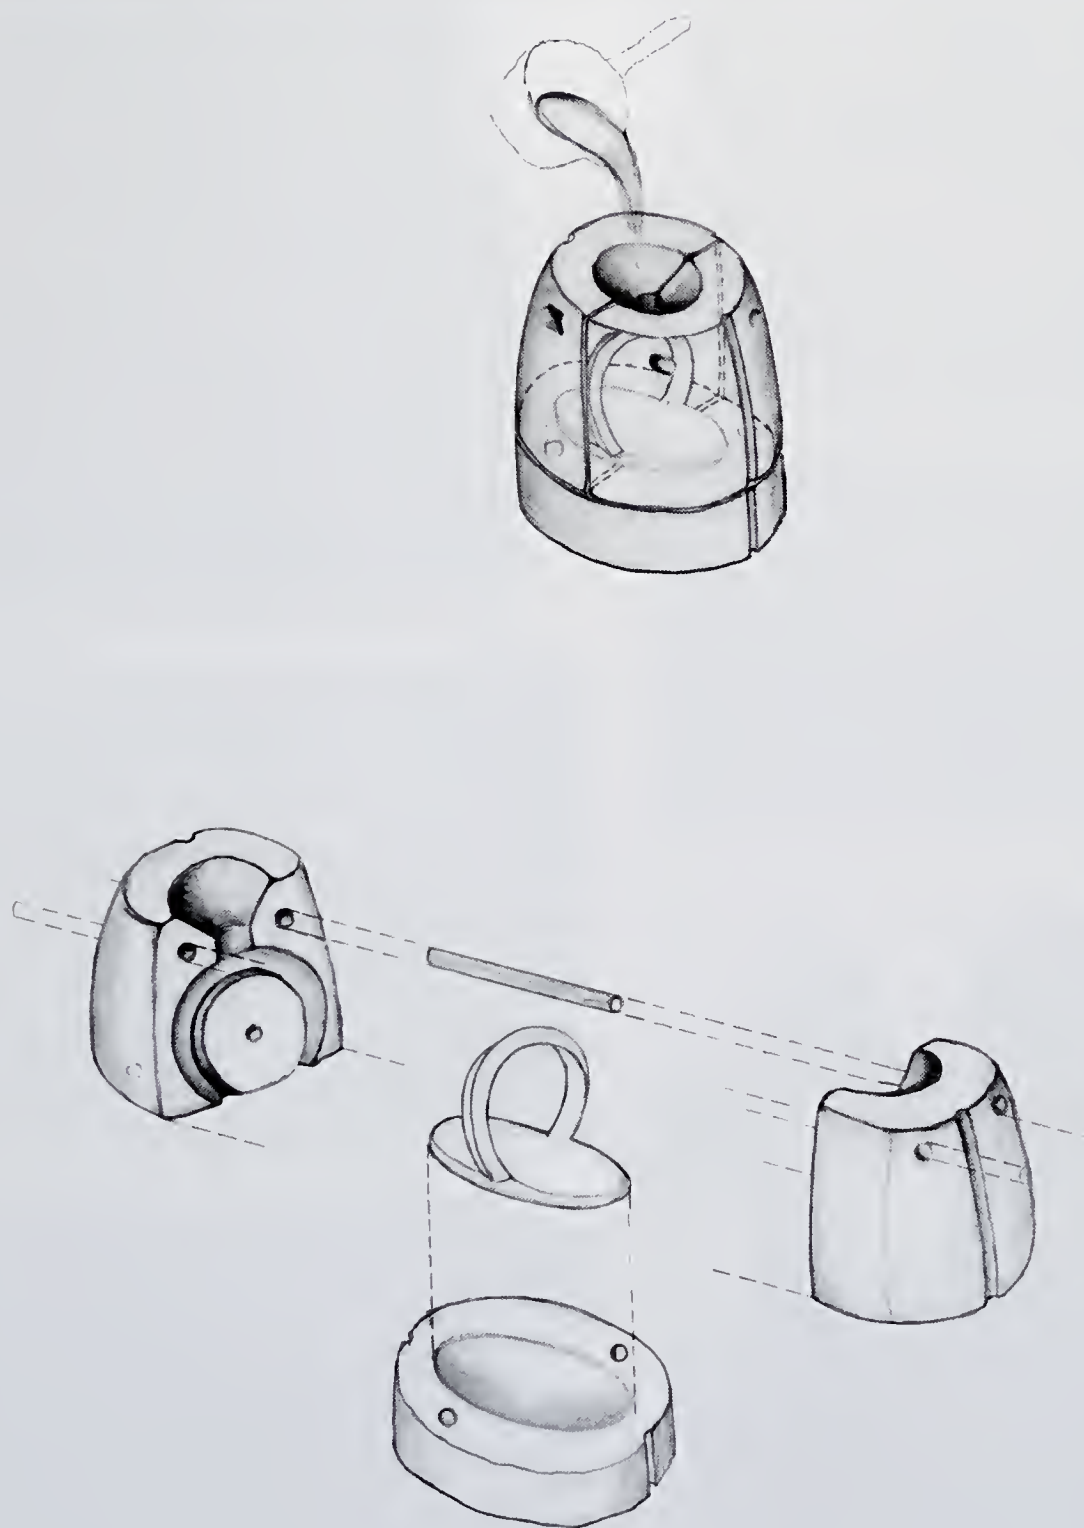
Drawing of a three-part mould, based on inv. no. 17976.
